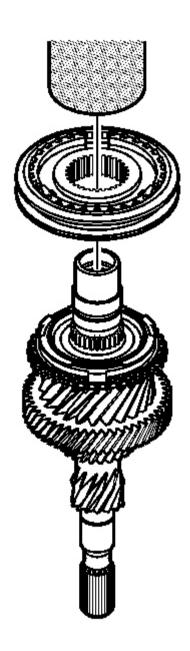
3rd/4th Synchronizer & J 24433 Courtesy of GENERAL MOTORS CORP.
